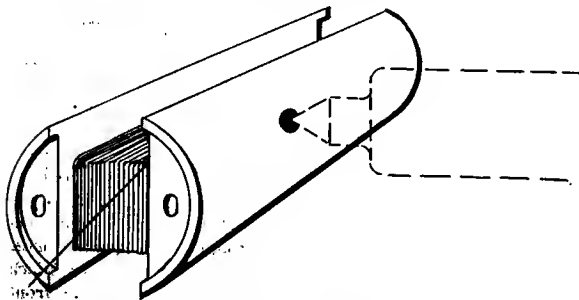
Showing the winding process with use of lathe. Dotted line indicates the dead center.
